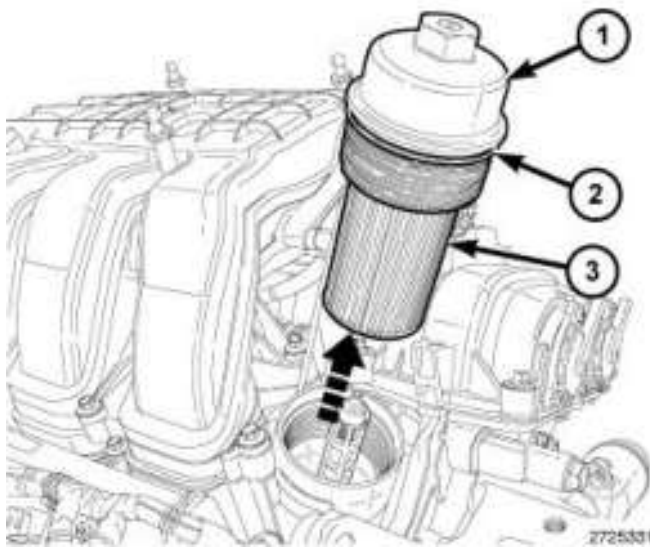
Oil Filter Cap, O-Ring Seal & Oil Filter
